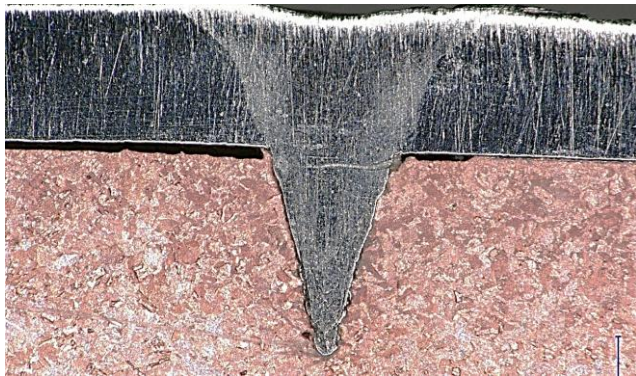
Welding of Different Metals: Solving the Problem of Welding Different Metals using High-Tech Laser and Electron Beam Methods, [32].
